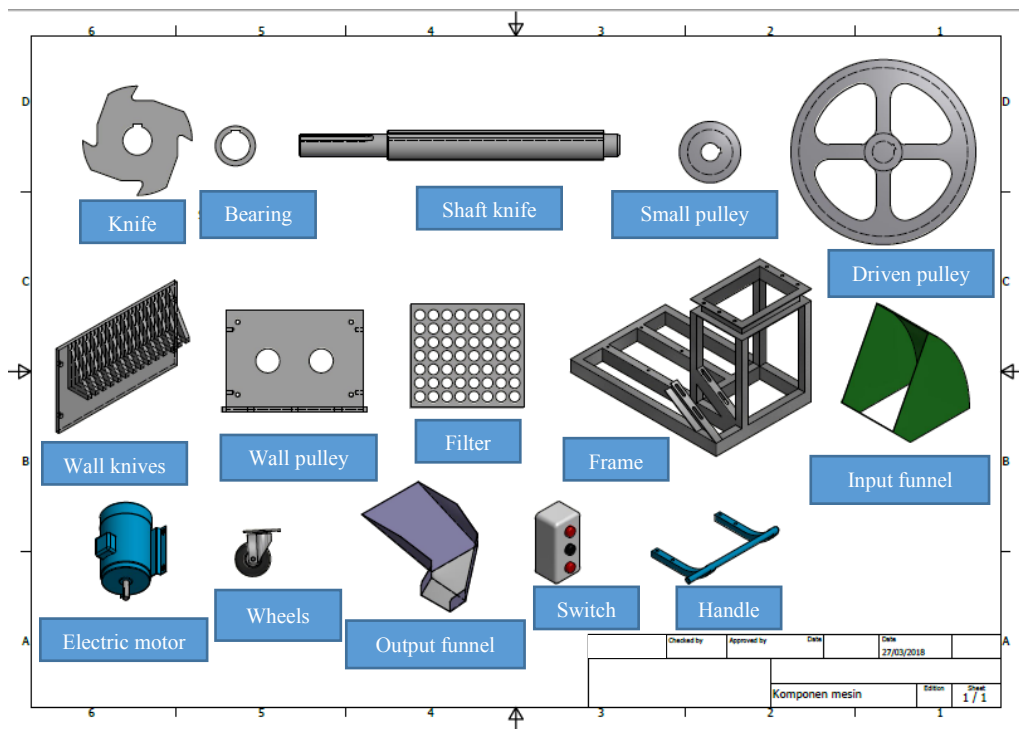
Components of portable chopping plastic waste machine utilizing electric motor.
